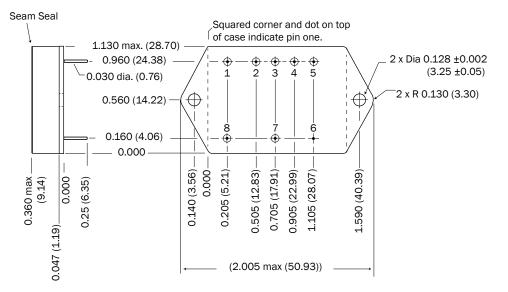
MFK SINGLE OUTPUT FLANGED
